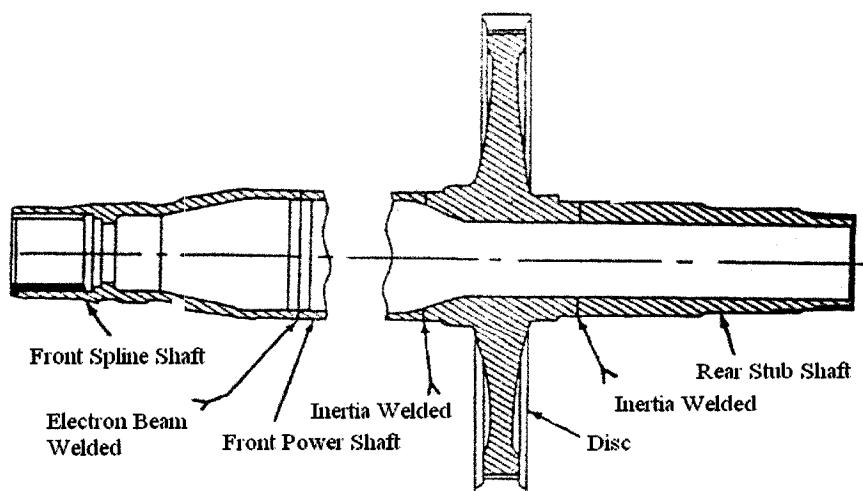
Shaft assembly. J.A. Miller and J.J. O'Connor (1980) [1]
